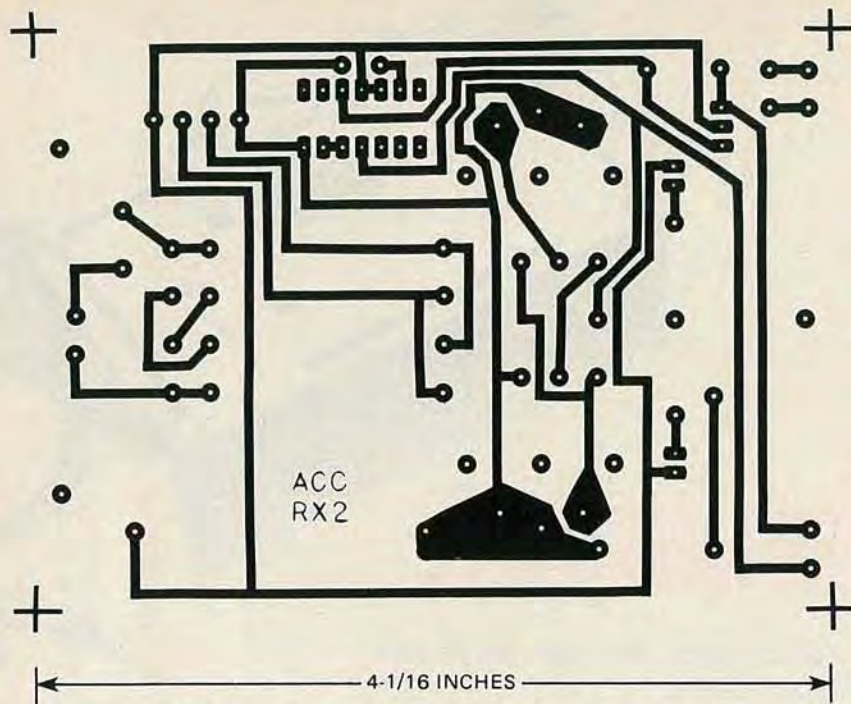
FOIL PATTERN for the PC board. Point-to-point wiring may also be used.
